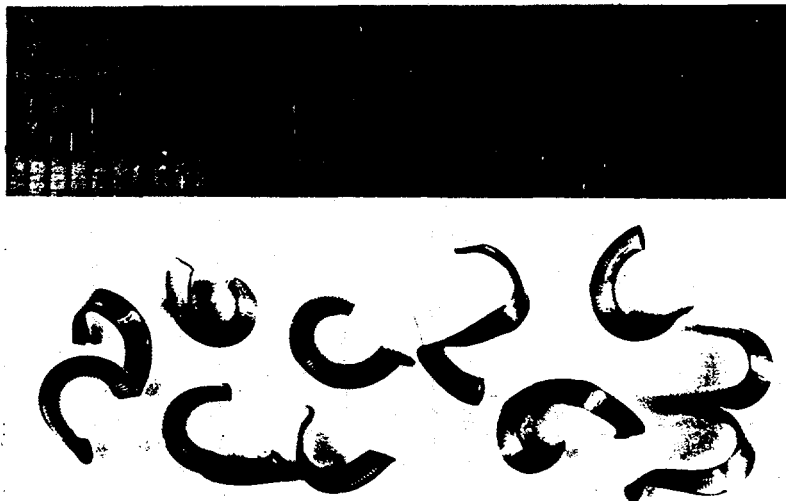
Loose broken arc chips by coated carbide tool with chip breaker.
